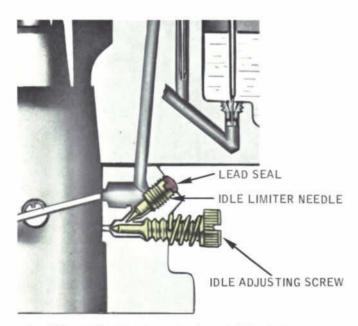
Idle Limiter, Seal and Idle Adjusting Screw — Carter 1-V Carburetor
